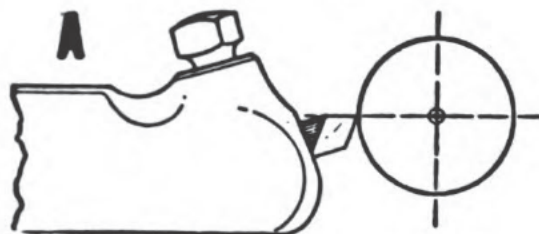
Setting the threading tool for cutting external screw threads.
